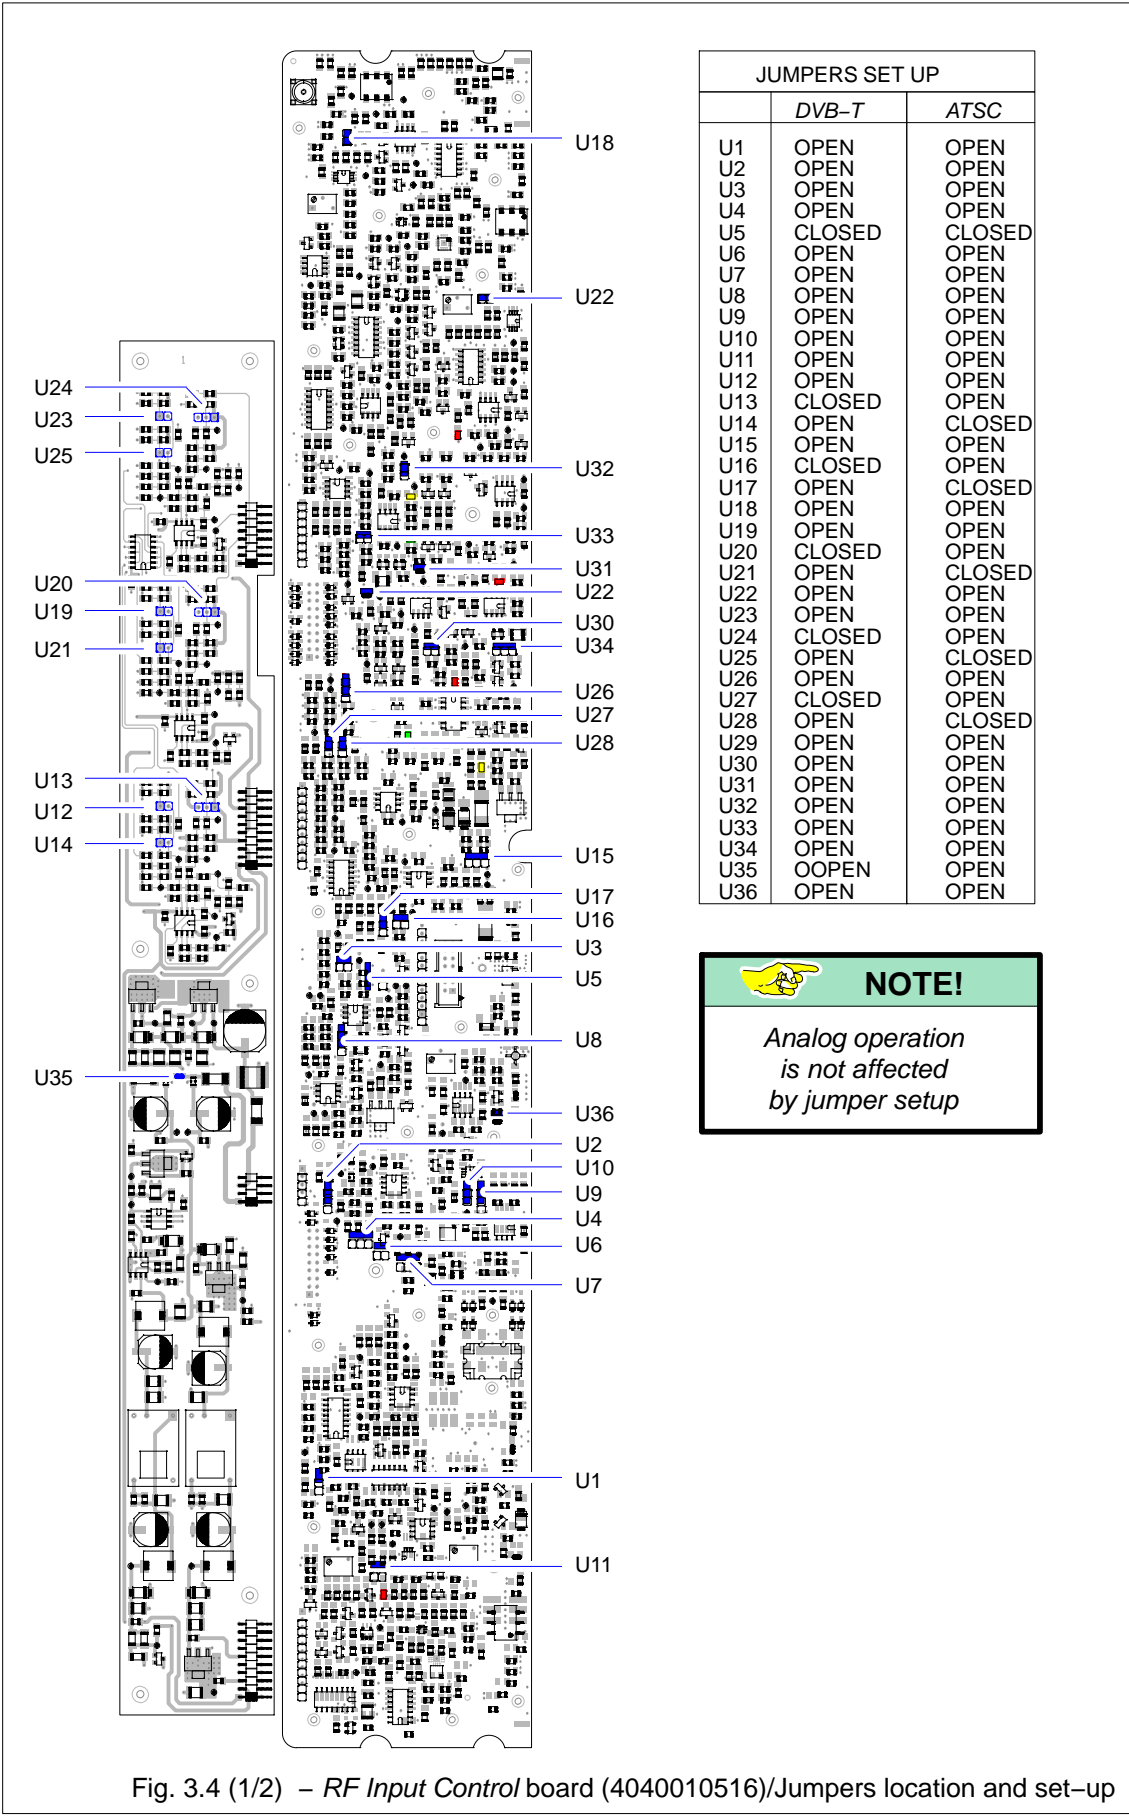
(1/2) – *RF Input Control* board (4040010516)/Jumpers location and set-up
